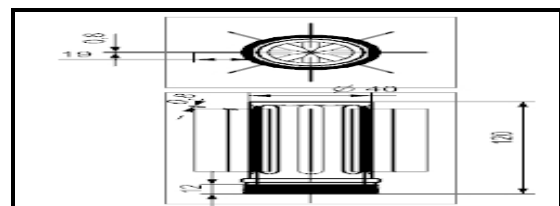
2D Model of Plain Straight Geometry Tower Fin Cooler
